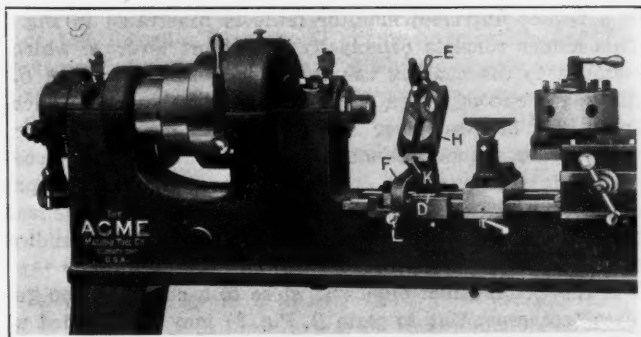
Front View of Universal Turret or Monitor Lathe equipped with Thread-chasing Attachment
